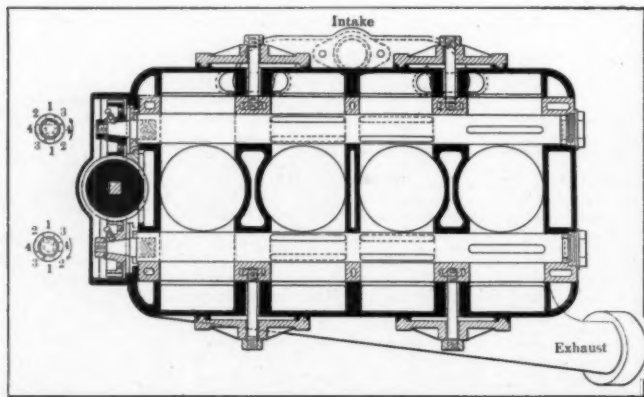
Plan view of the motor in section, showing the relation of the cylinders, valves and ports
